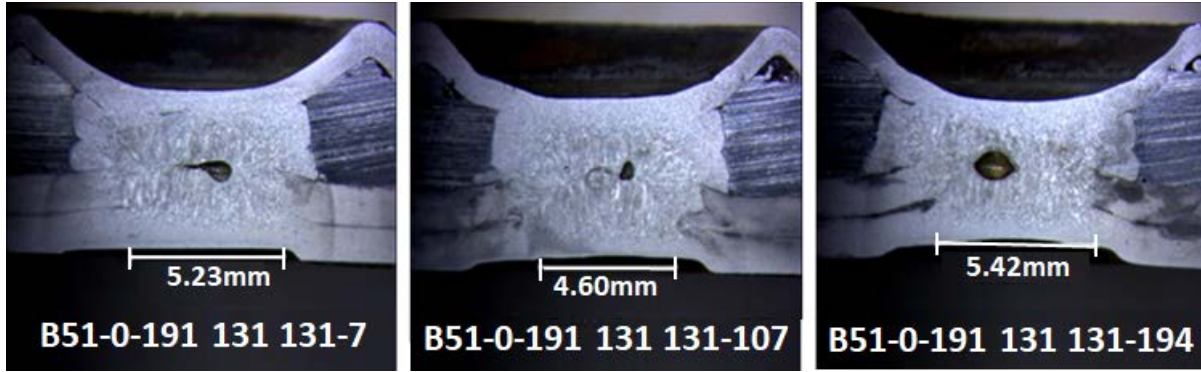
F.5. Results from the EL Trial – 1.2 mm 980MPa to 1.2 mm 980MPa to 3.0 mm Aural 2-T7 (6 mm pilot) – through the Dow 5055-C with R4-6GA-V rivet (left to right): Weld #7 Section, Weld #107 Section, and Weld #194 Section. Source: Arconic.
